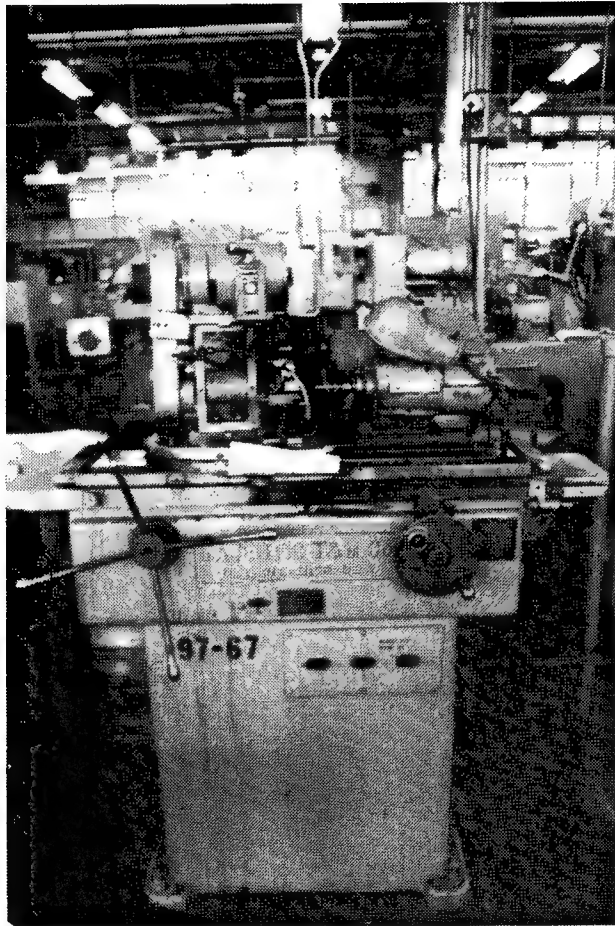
Building 10: Grinder manufactured by Majestic T & M Co., Detroit.
